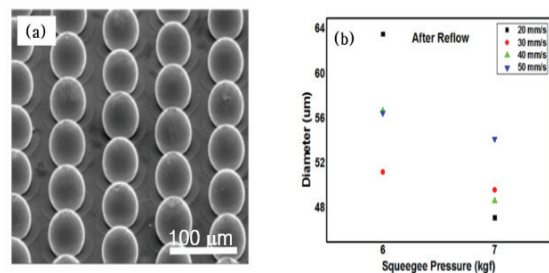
After reflowing, about 50μm bump printing by type 7 solder paste.¹⁷⁾
